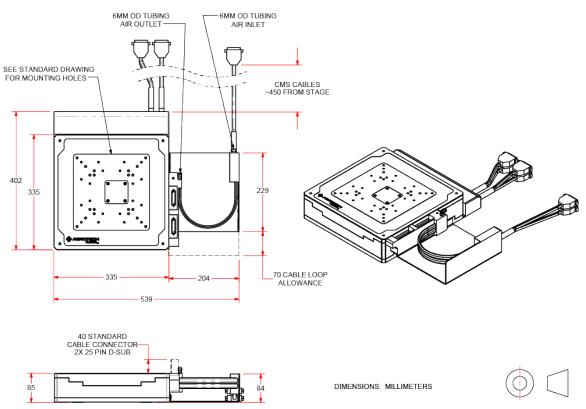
PlanarDL-200XY-CMS2 Dimensions
